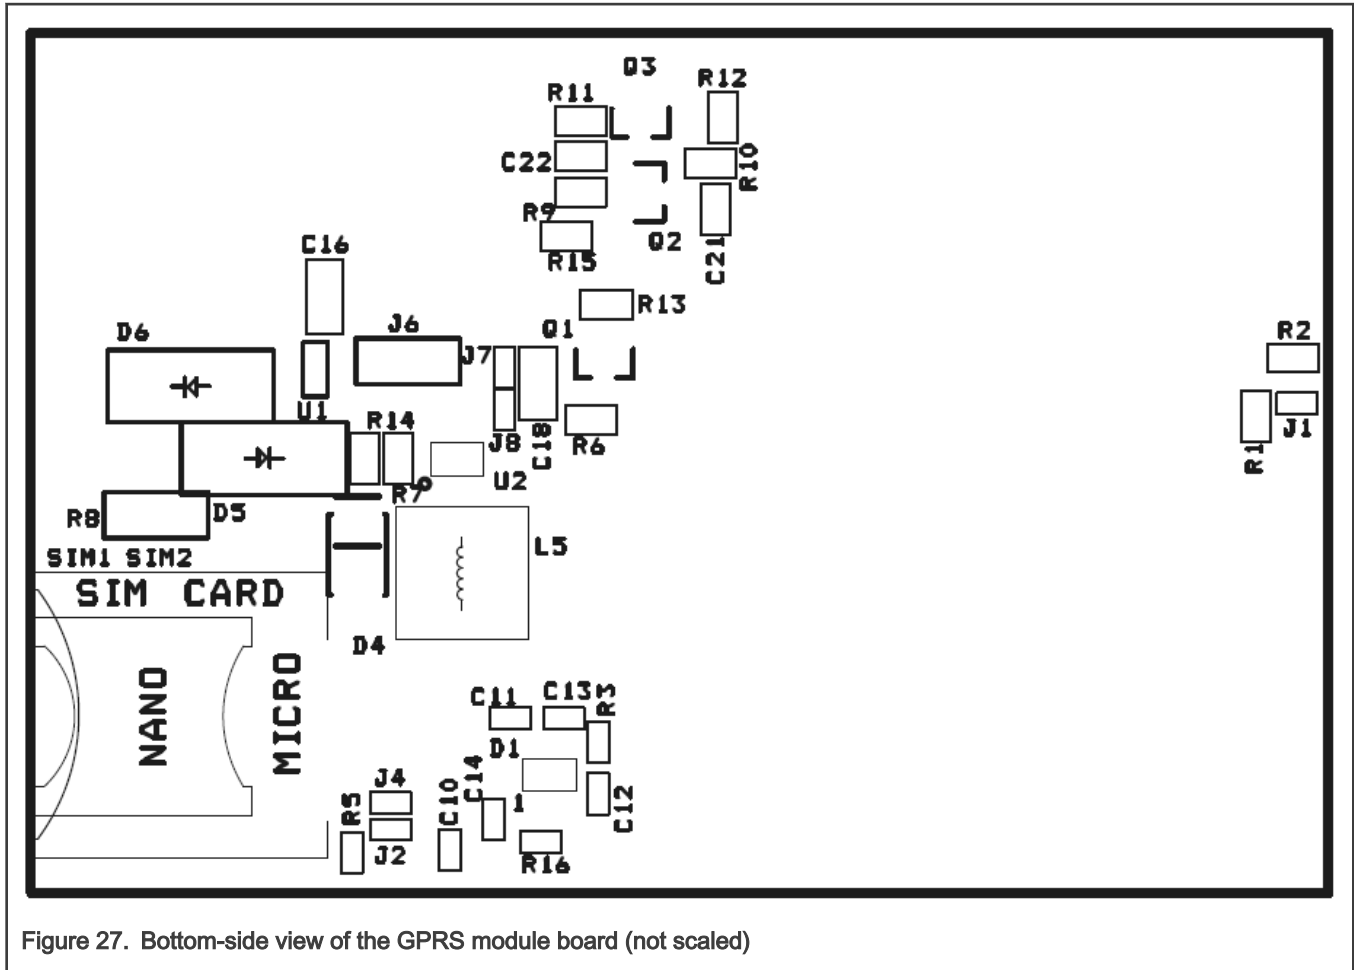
Bottom-side view of the GPRS module board (not scaled)
